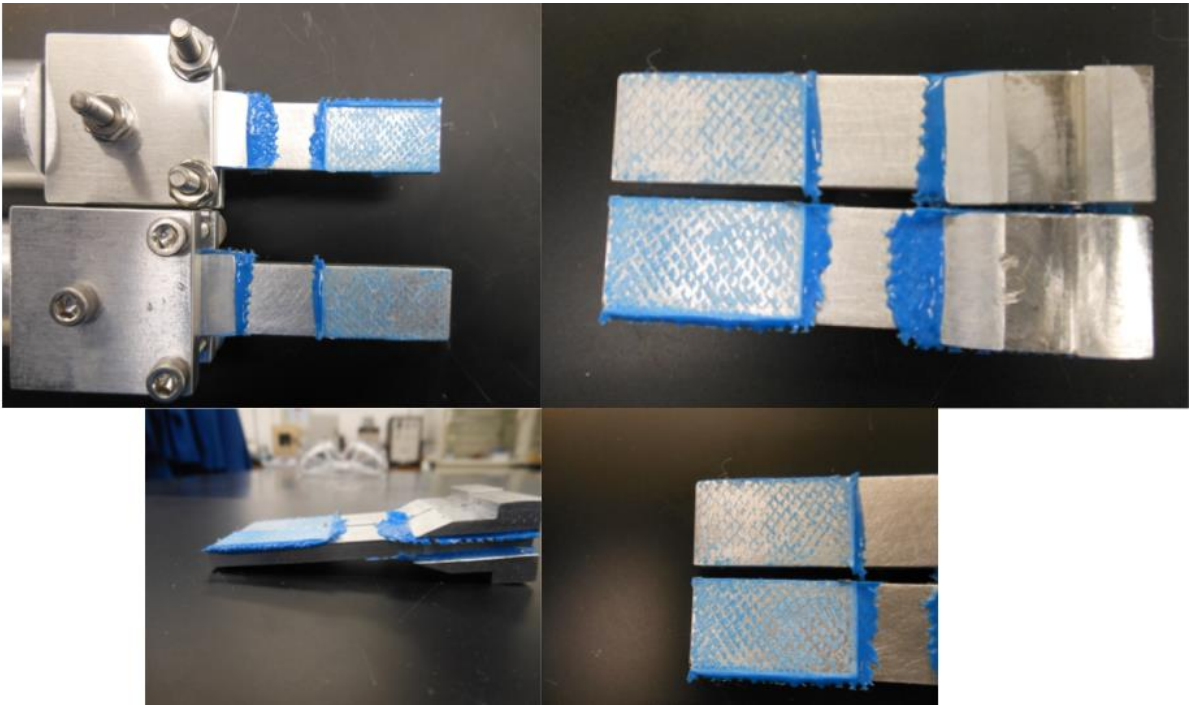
SLJ-Sample 1-Fracture Surface
